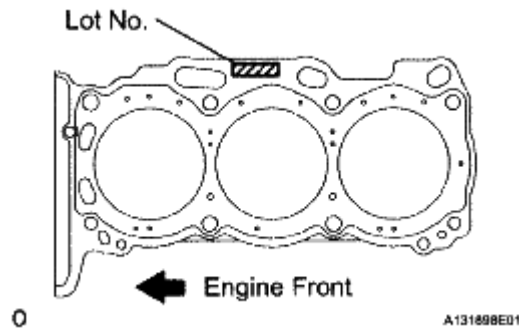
Placing Cylinder Head Gasket On Cylinder Block Surface With Front Face
